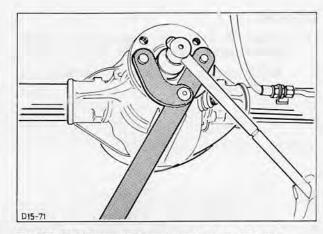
Hold flange with special tool no. 15–030 and unscrew nut
